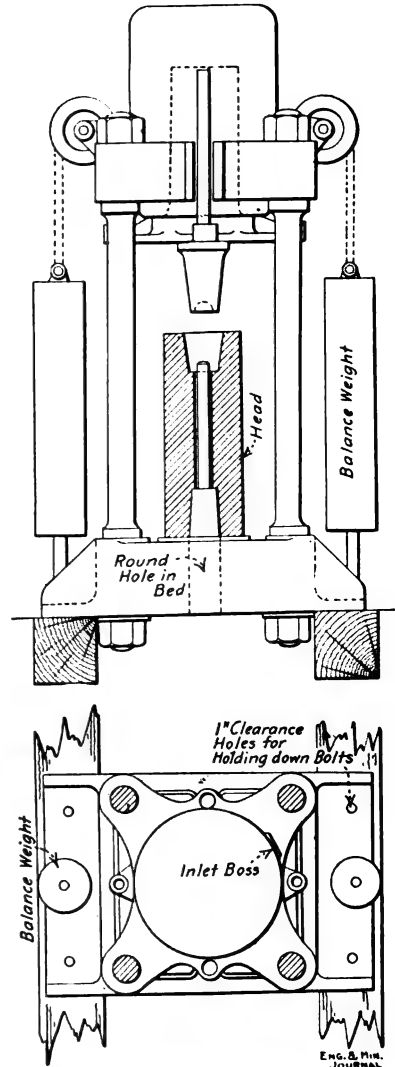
HYDRAULIC PRESS FOR REMOVING BROKEN STEMS FROM STAMP HEADS.
